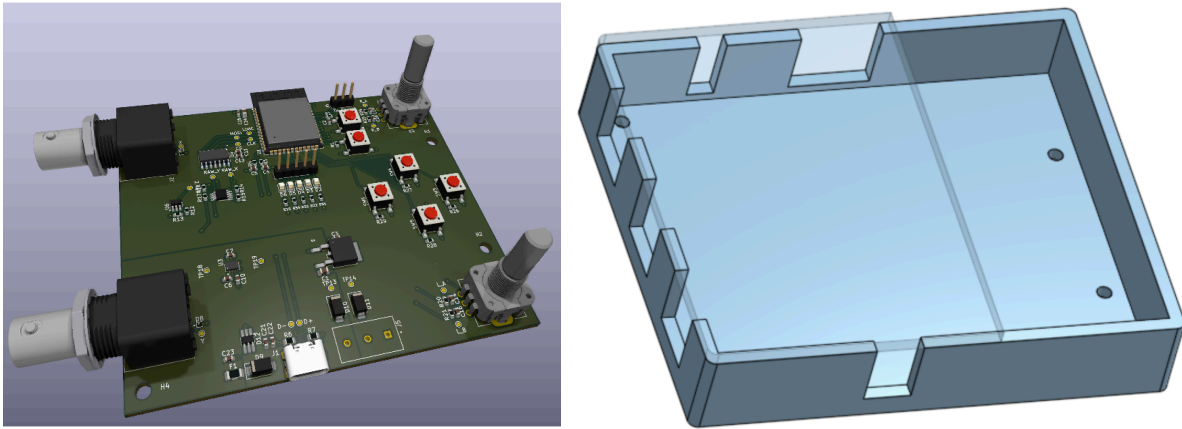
3D-PCB layout v1 and 3D-printed enclosure v2 design. The left image shows the PCB with external controls and connectors, while the right image shows the enclosure with cutouts for board mounting and cover.
